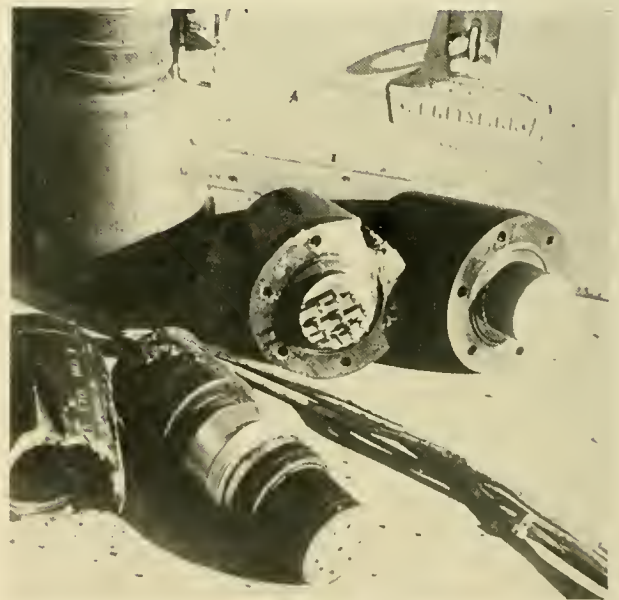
A short circuit produced these burned penetrator housings on ALUMINAUT (NAVOCEANO)
